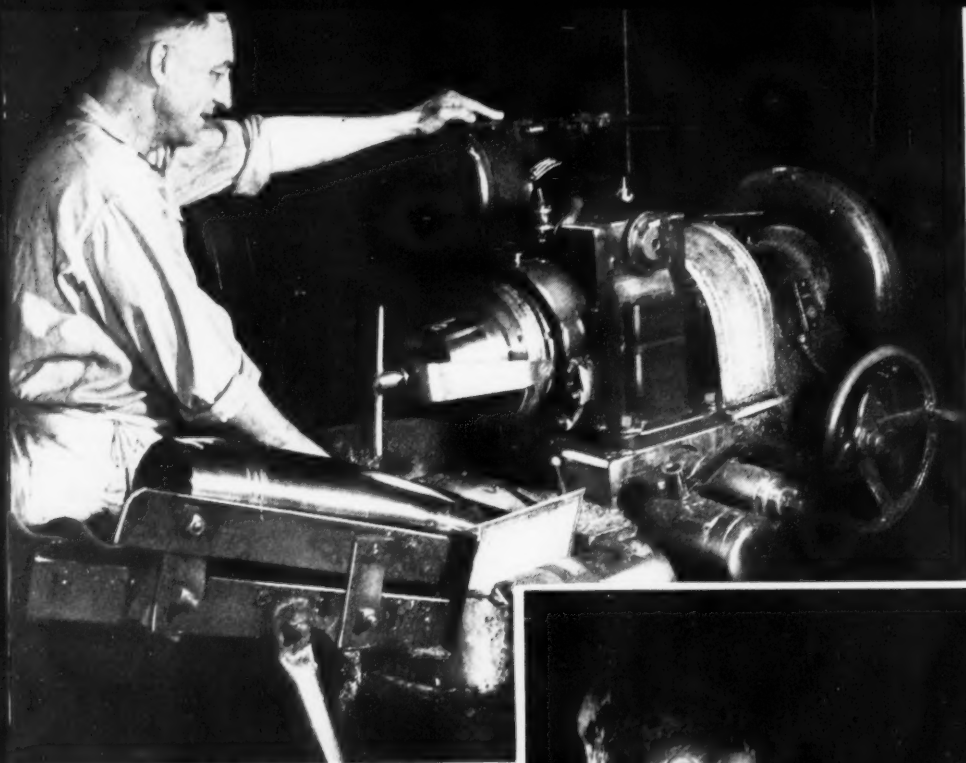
Cutting an Internal Thread in a Shell Nose to Receive the Booster by Employing a Thread Milling Machine
